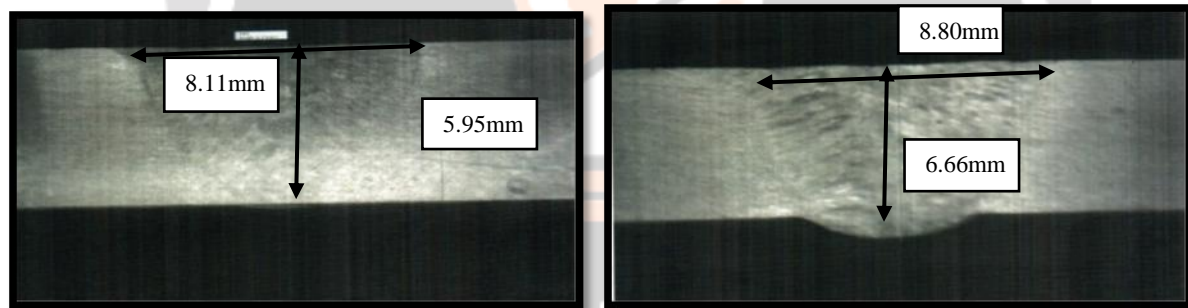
Weld Geometry at Travel speed 65mm/min & 85mm/min, welding current 180A & 160A and Pulse Frequency 2Hz & 3Hz.
